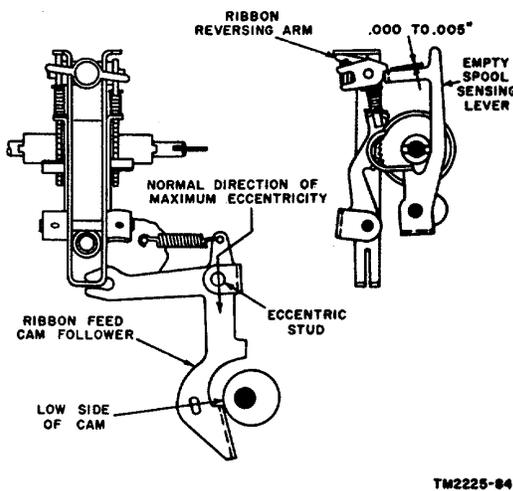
Ribbon feed reversing toggle adjustment (TT-76A/GGC and later models).
